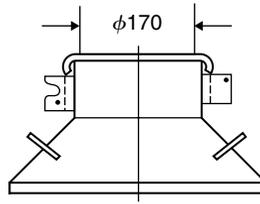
Neck with welding brackets and handles.
